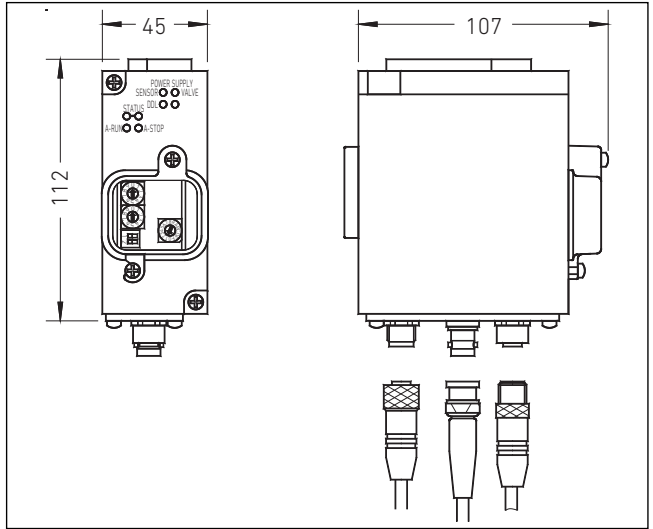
Dimensions of the bus coupler with drivers (337 500 056 0)
